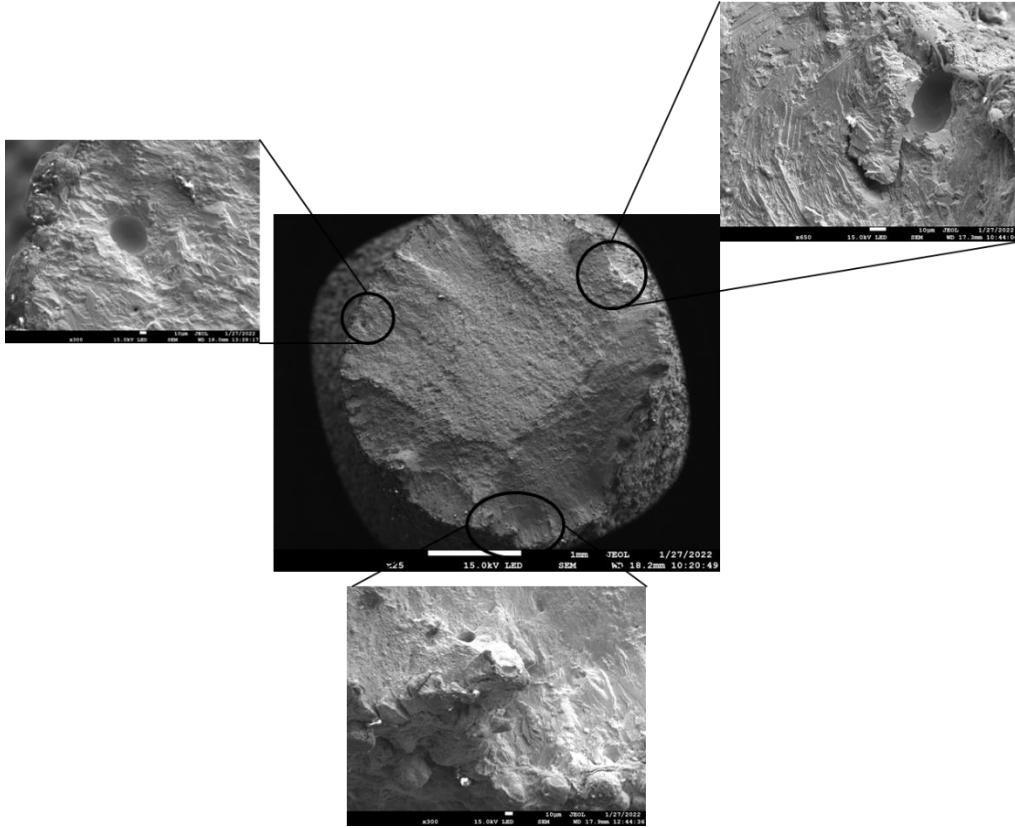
Fractography of fatigue sample 2 fabricated with 280 W.
